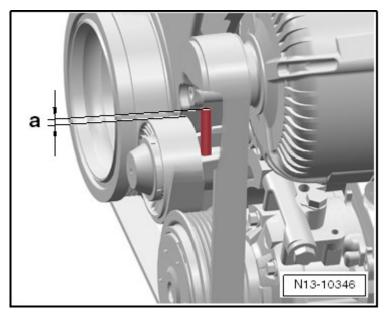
Identifying Dimension -a-: End Of Tensioning Roller Bolt Over Running Surface Of Tensioning Roller
